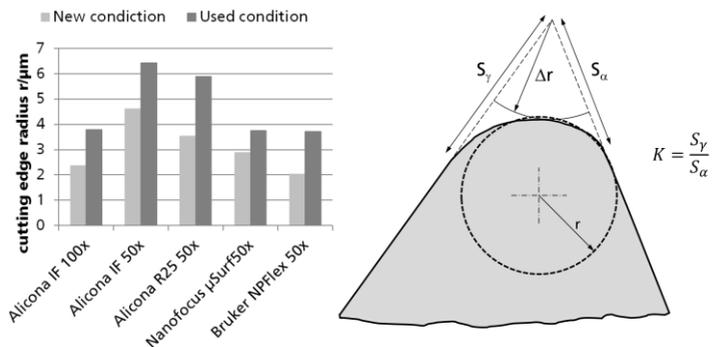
Measured cutting edge radii of a 2 mm end milling cutter (left); form feature of one cutting edge profile (right)
